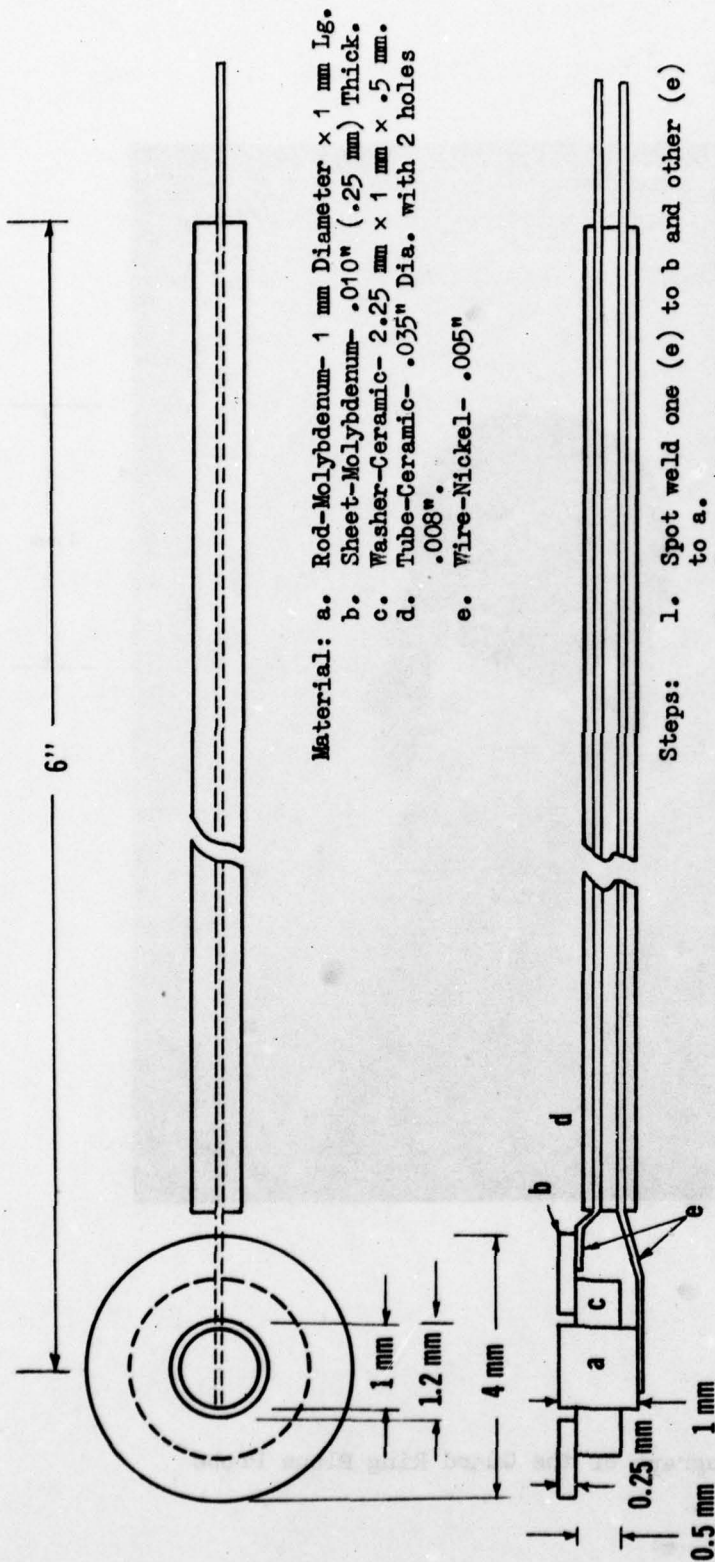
Assembly Drawing for the ARL Plane Probe Plus Guard Ring
